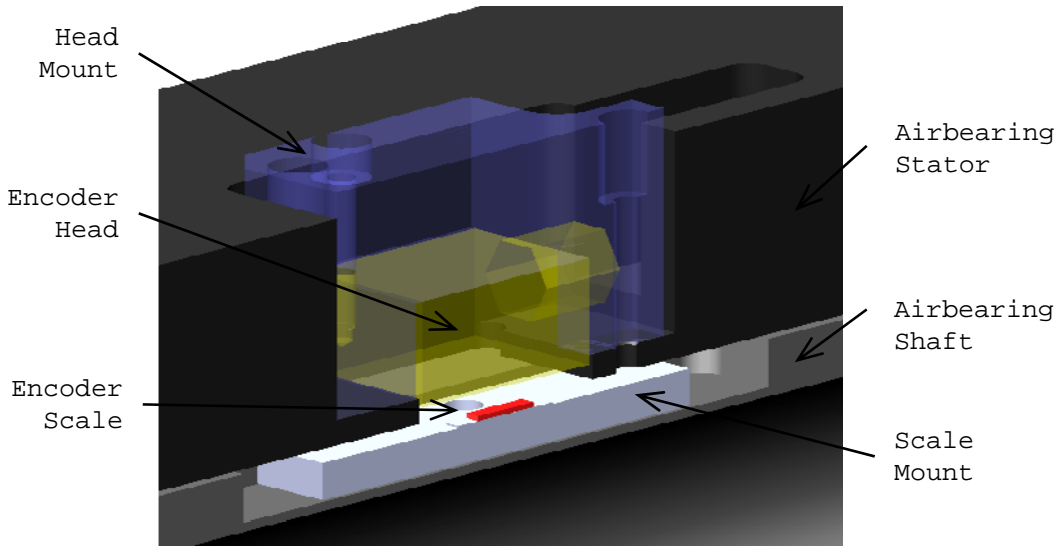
CAD Model showing a closer view of the encoder assembly
